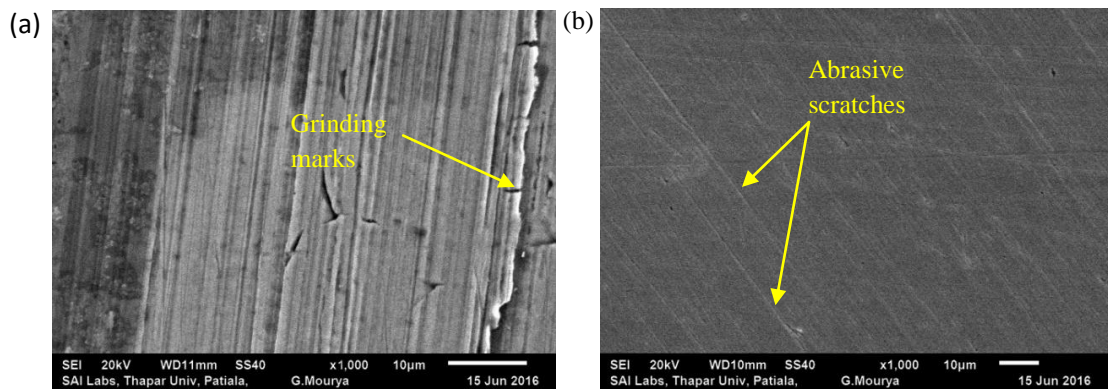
Workpiece surface under SEM at 1000X magnification (a) before finishing and (b) after finishing
